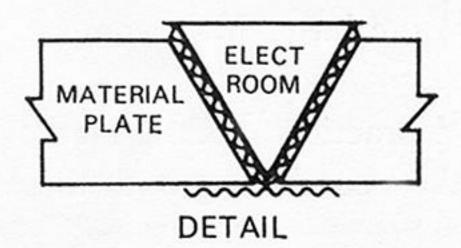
Welding butt joint longitudinals using c.b.s. (contact bar submerged arc welding).
